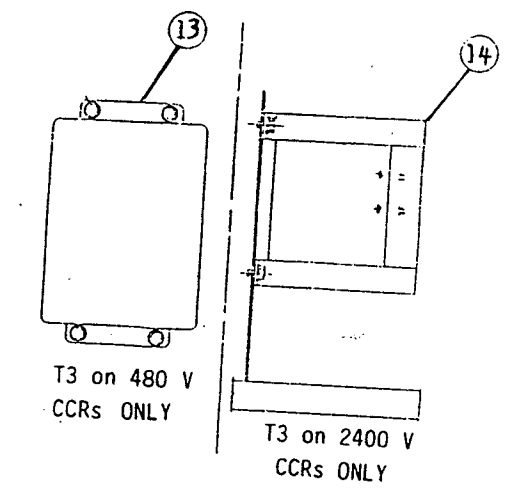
COMPONENT PLATE ASSEMBLY FOR 15-30 kW CCRs
